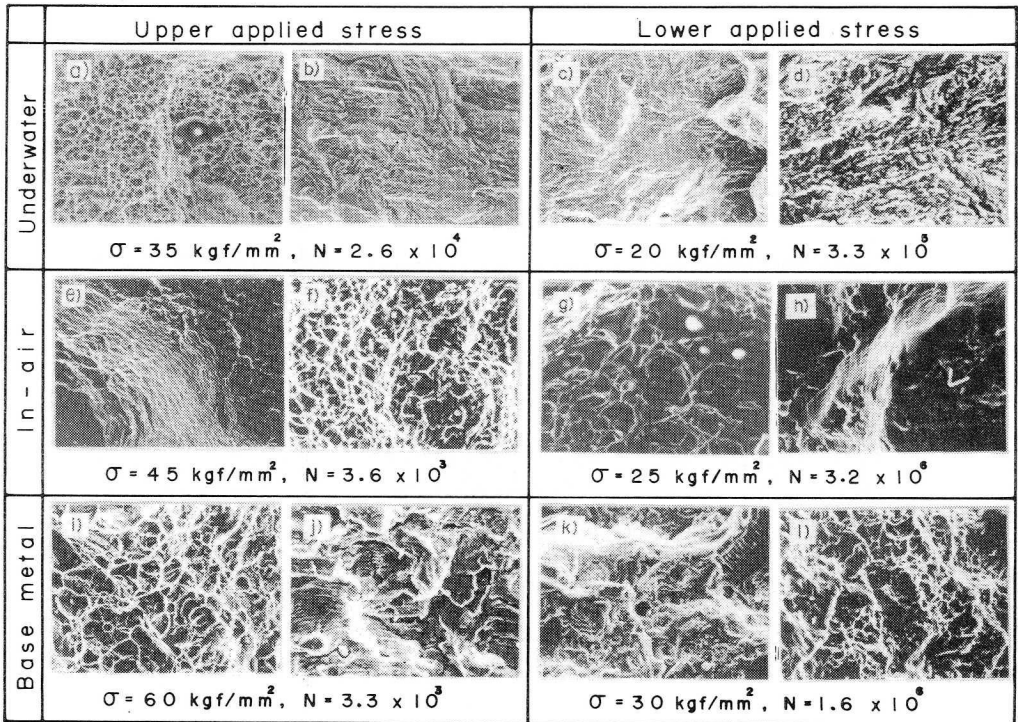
Typical fractographs of fatigue fracture surface
